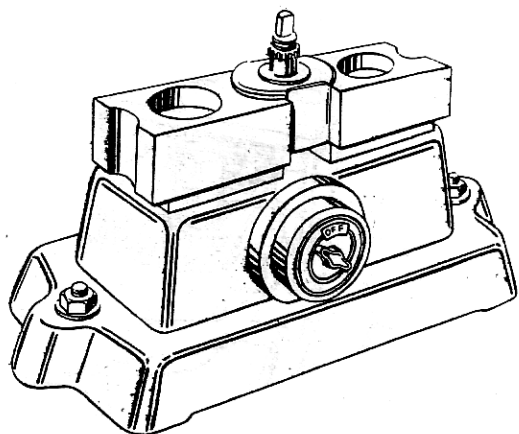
Magnetizing Standard Two-pole Rotor with Bar Magnets. To magnetize standard two-pole rotor with block magnets, use same setup but reverse charging blocks.
